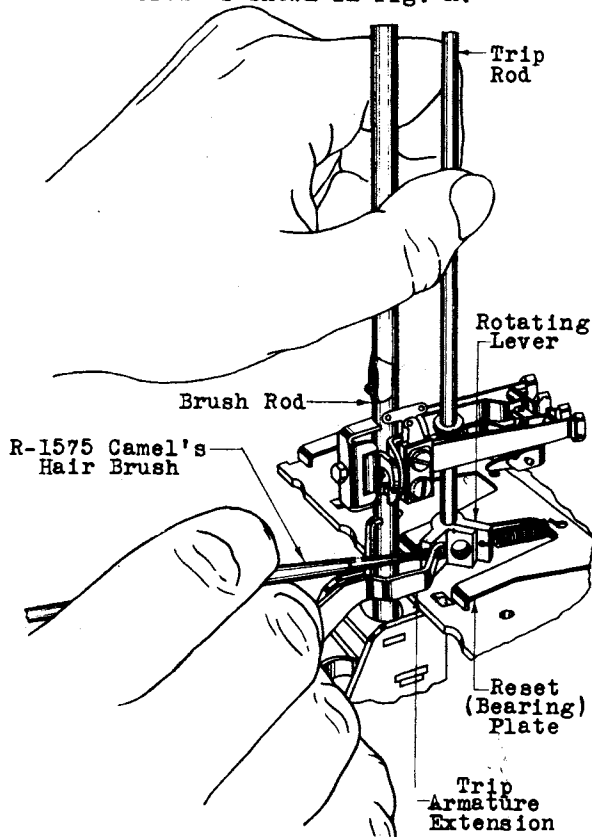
Fig. A - Method of Lubricating Trip Rod Rotating Levers and Trip Armature Extensions
